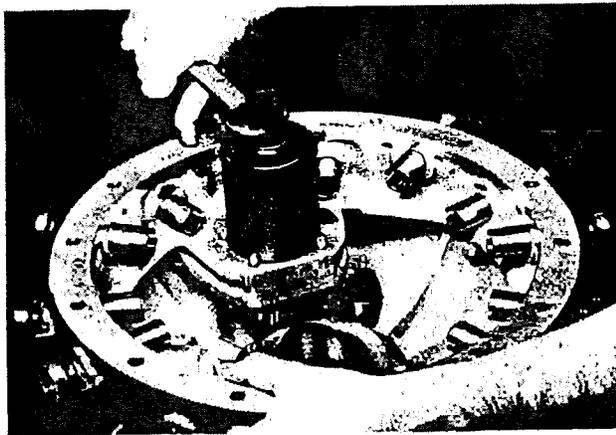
A - Removing Cam Drive Pinion Shaft - New Method
